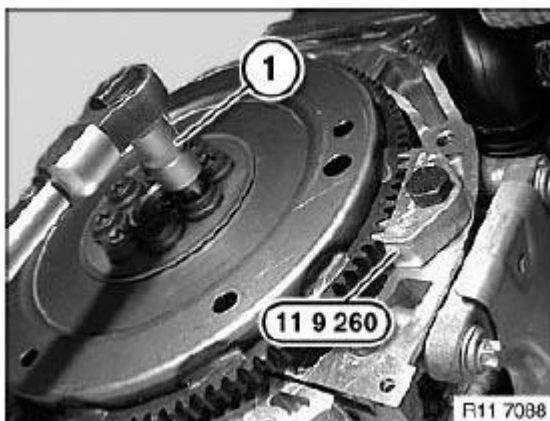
Releasing Flywheel Screws With Suitable Tool
